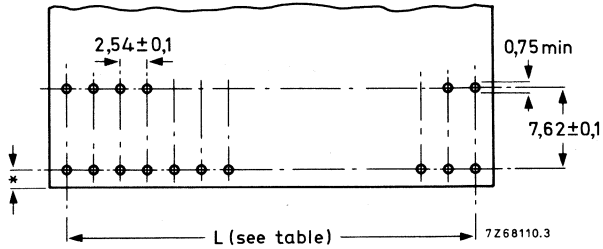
Piercing diagram for a double row board edge socket. The dimension marked * is determined by customer application (min. 2 mm). The hole diameter applies to plated-through holes.
